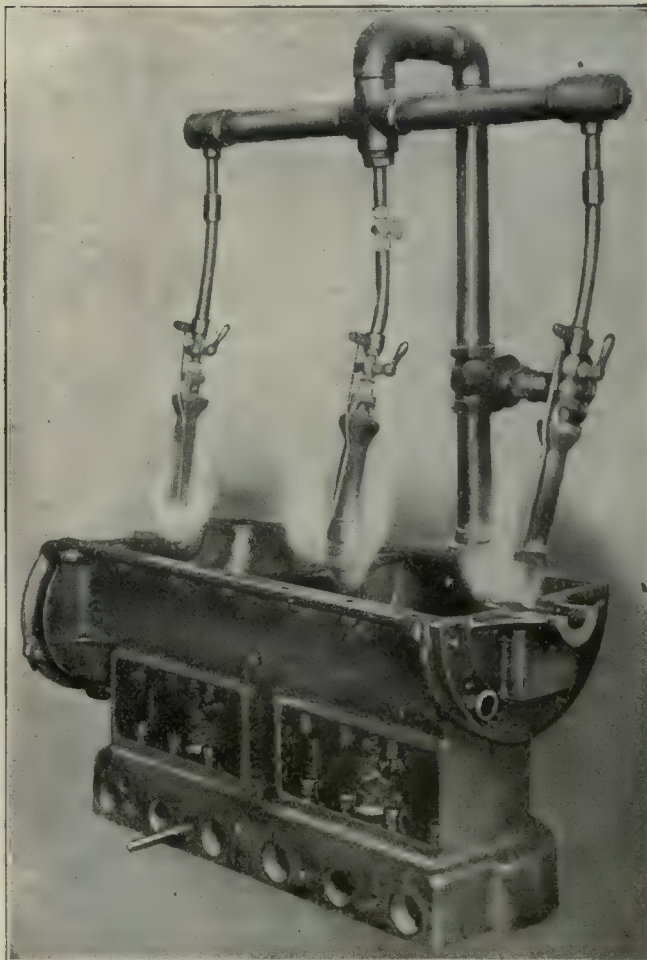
MELTING THE BABBITT FROM THE CRANKSHAFT BEARINGS
